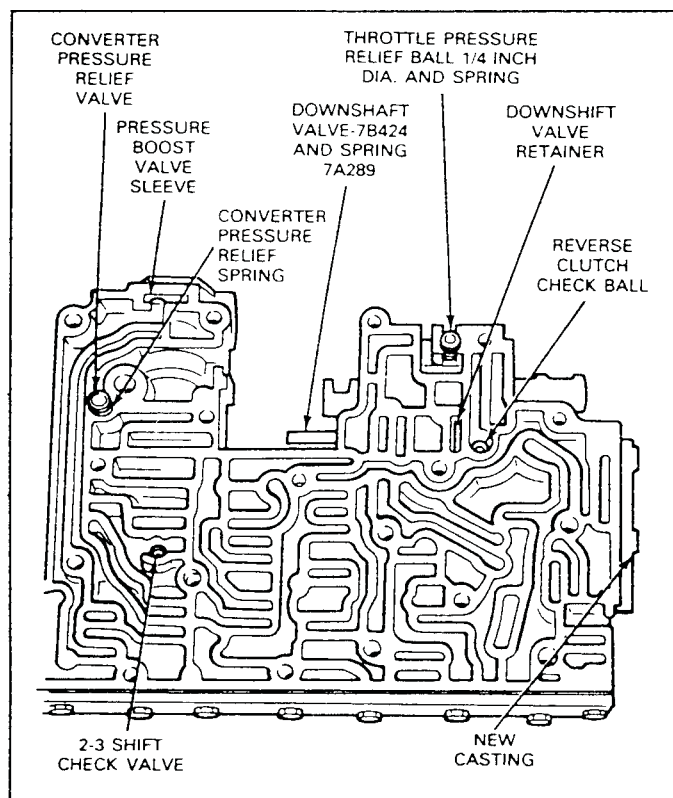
Downshift Valve and Spring, Converter Pressure Relief Valve, Throttle Pressure Relief Valve Check Ball, and 2-3 Shift Check Valve Locations
